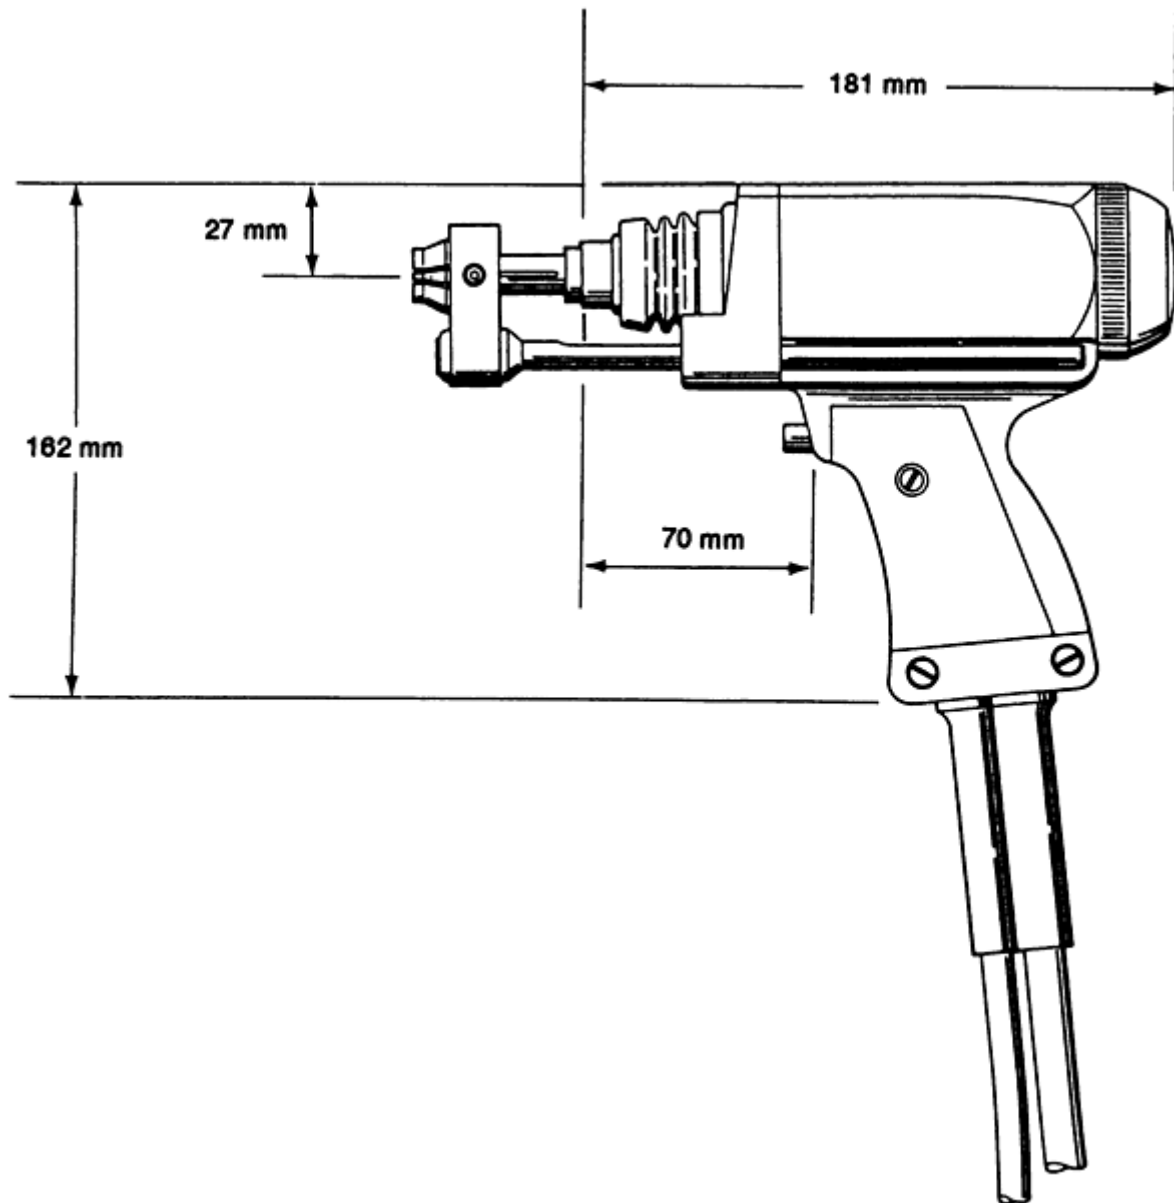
TYPICAL STANDARD-DUTY GUN FOR STUD ARC WELDING
